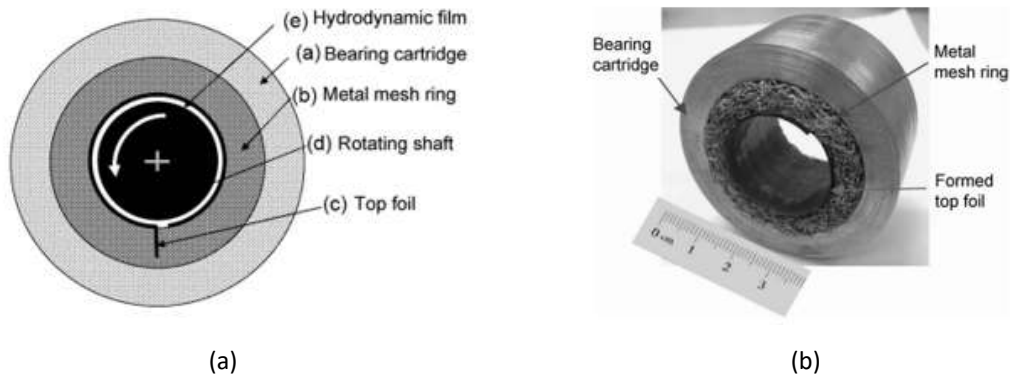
(a) Schematic representation of metal mesh foil bearing; (b) Photograph of a metal mesh foil bearing, taken from [58]
